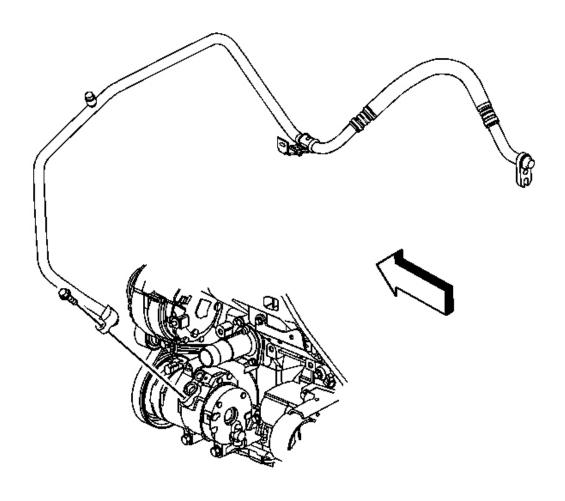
Identifying A/C Evaporator Line Courtesy of GENERAL MOTORS CORP.
